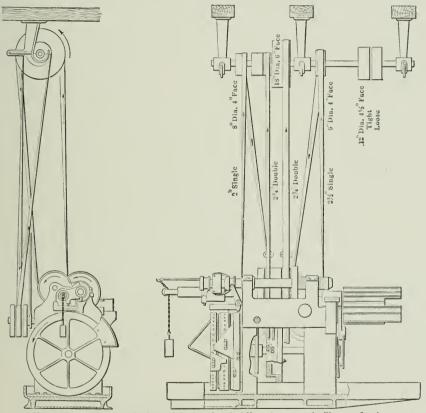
Countershaft and Drive for Gridley Automatic Turret Lathe
